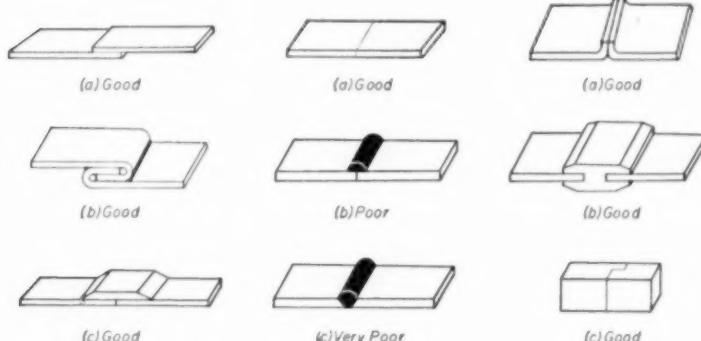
(Above Left) Brazed Lap Joints. Three examples of good design practice
